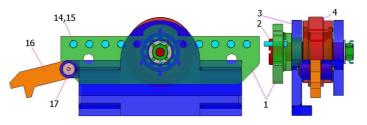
Overall solution for the roller guide mounted on the feed mechanism
